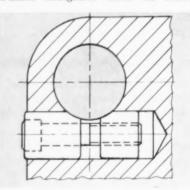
For a tighter grip, two clamps are employed, as shown in the sketch herewith.
